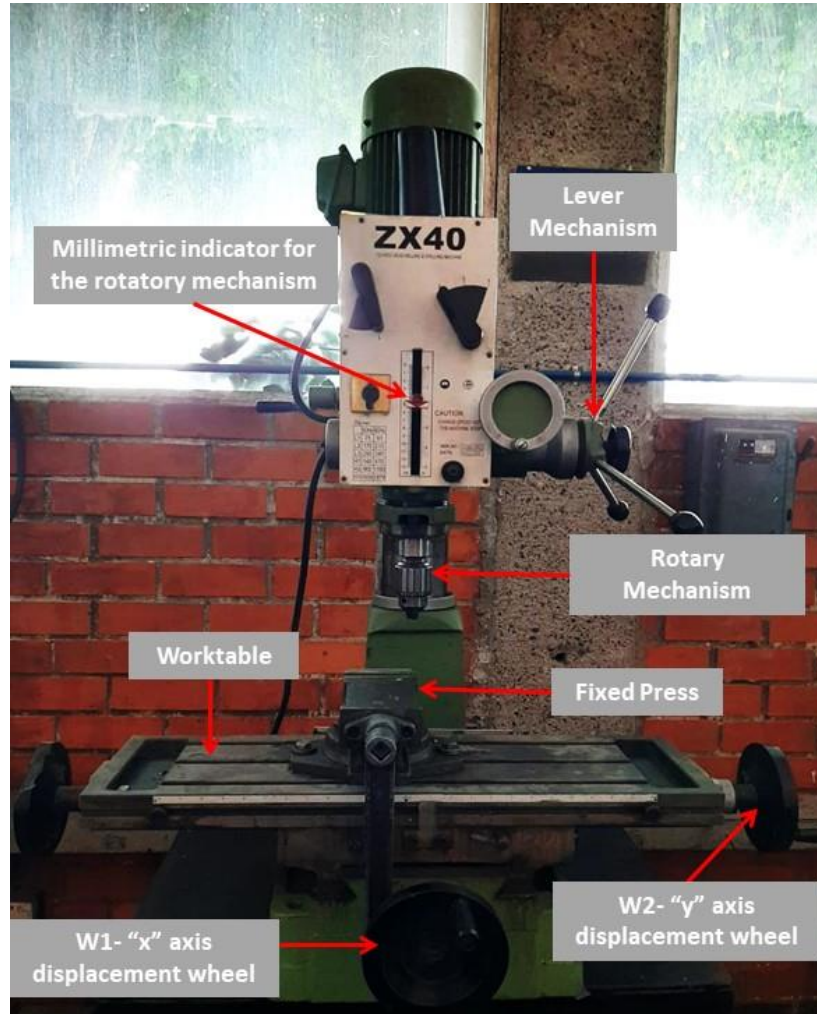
Grind mill drilling machine employed to shape the final bone samples for the experiments.
